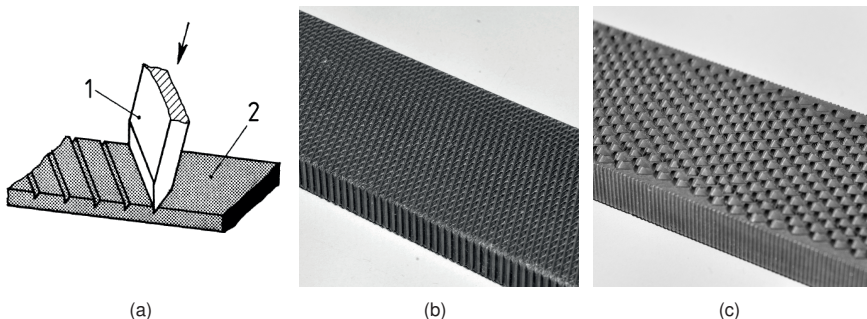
Notching: (a) punching tool [108]; (b) file cut; (c) rasp cut.
